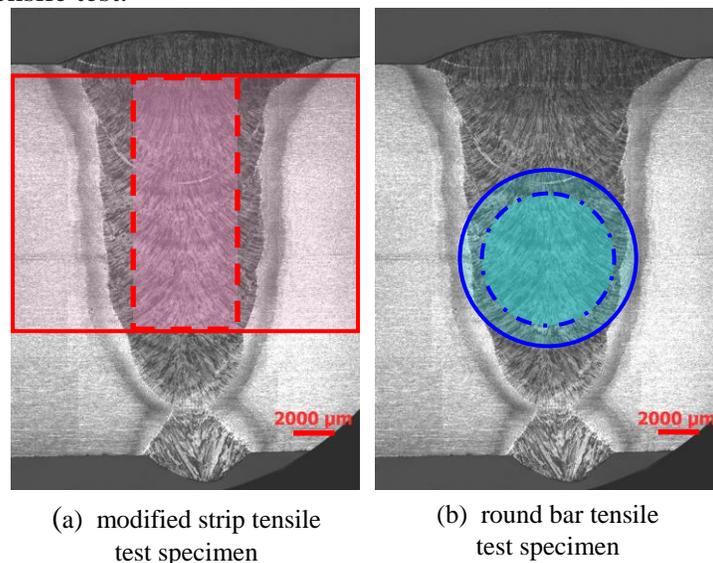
Tensile specimen location in narrow gap weld cross-section
